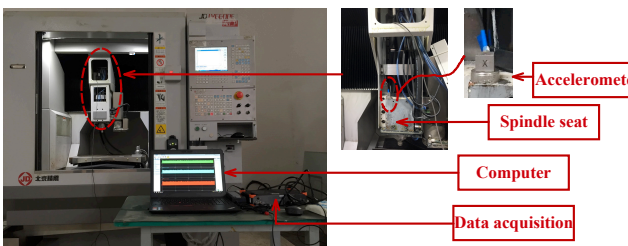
The cutting tools experimental setup for ultra-precision machining.
